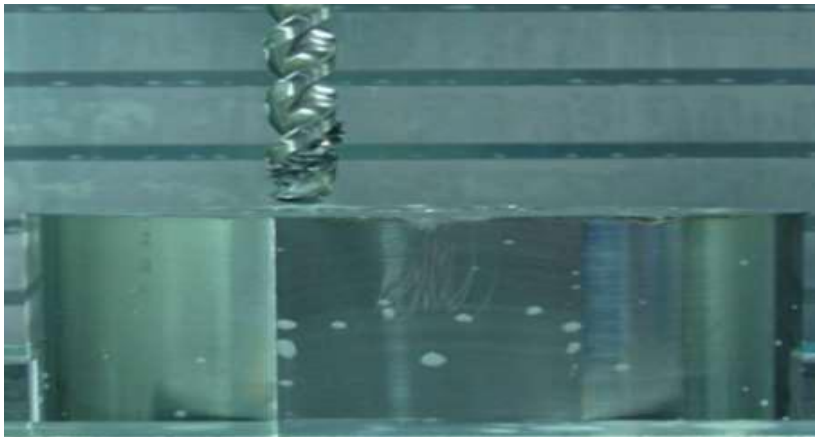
TI-6Al-4V MATERIAL WELDED ON THE TOOL
